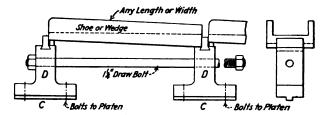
Sketch of Improved Chuck for Guldes, Crosshead Gibs, and Shoes and Wedges
